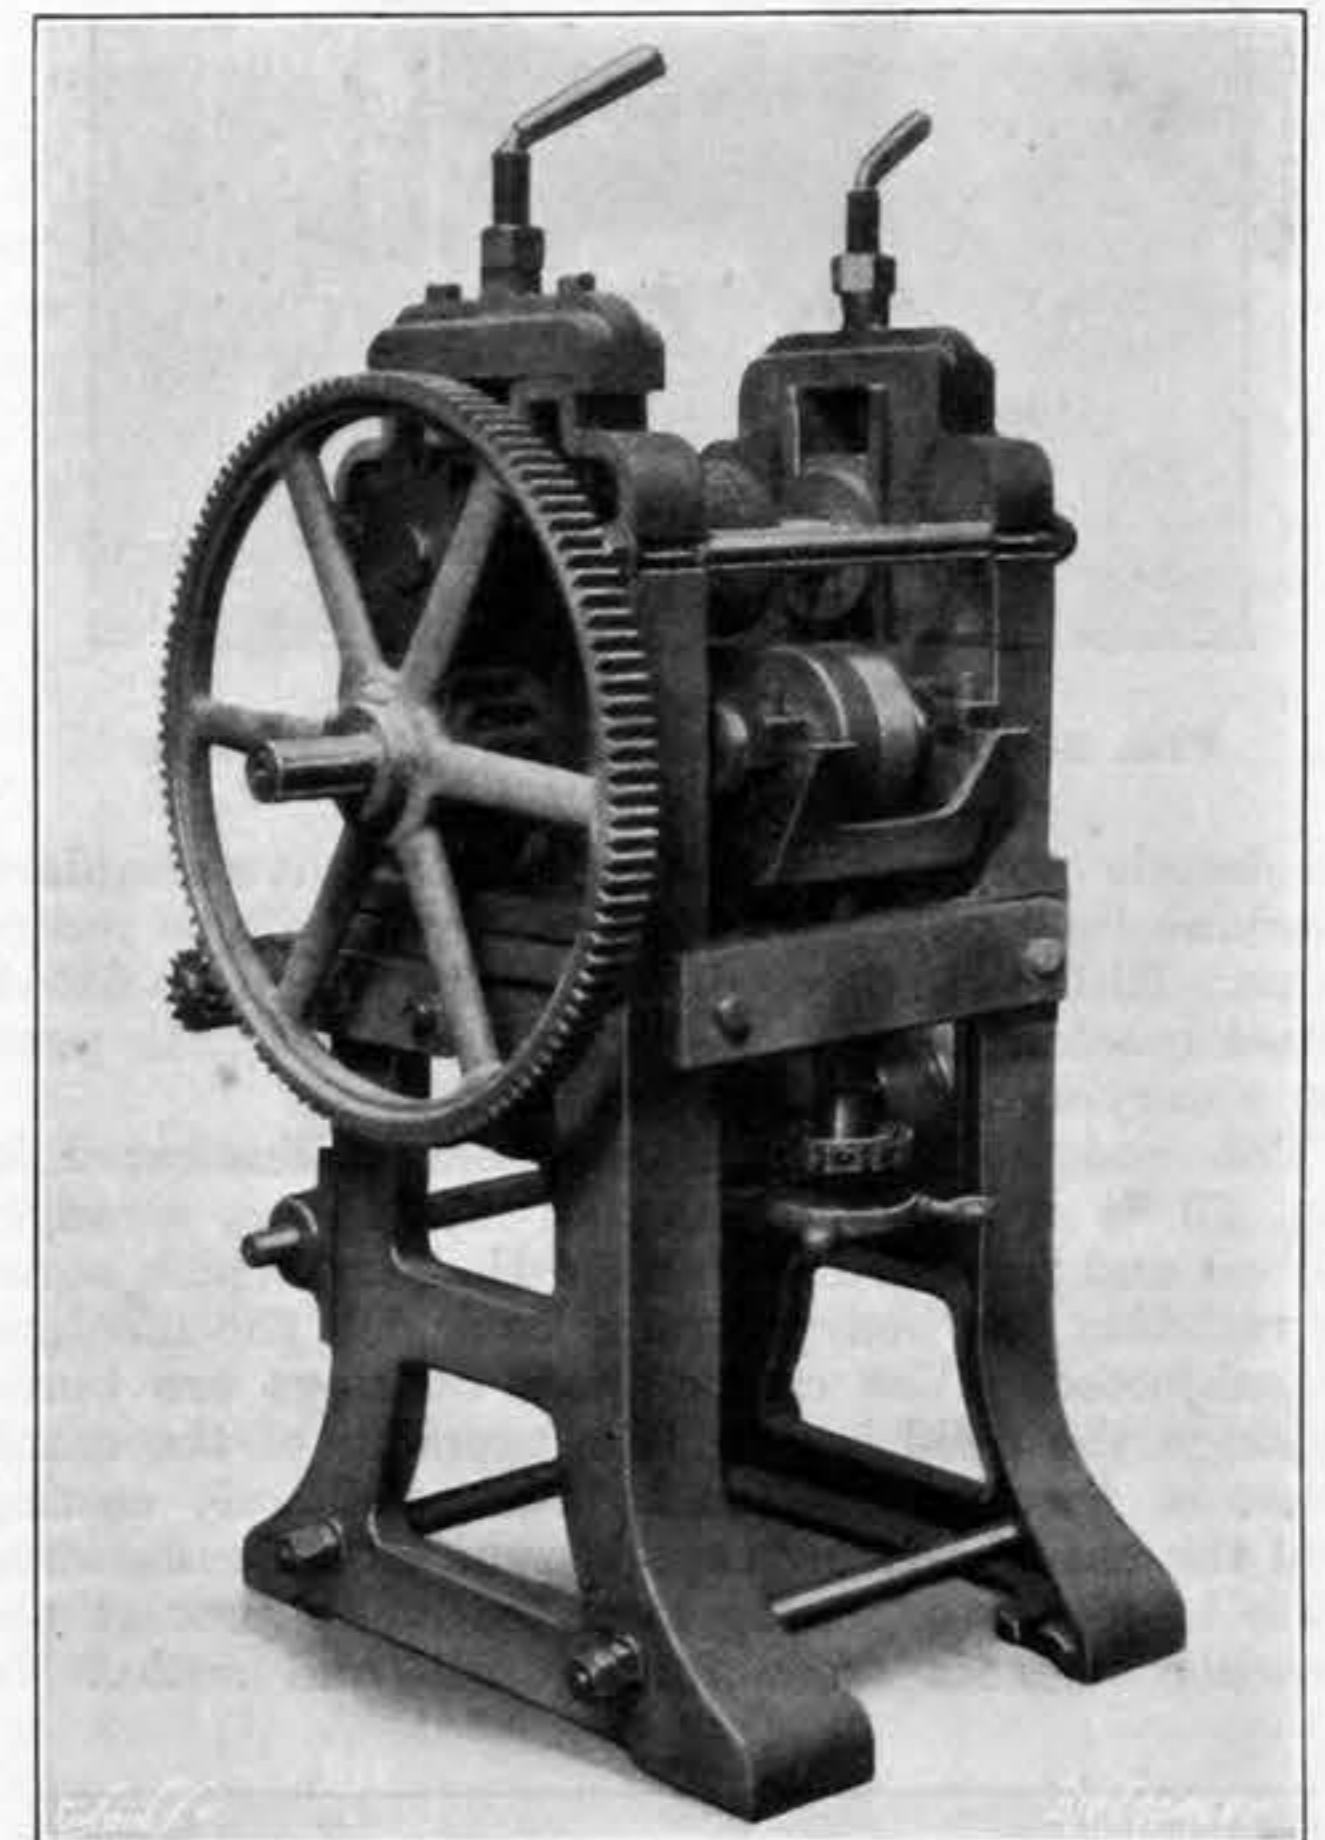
ANGLE IRON BENDING MACHINE—FROST
